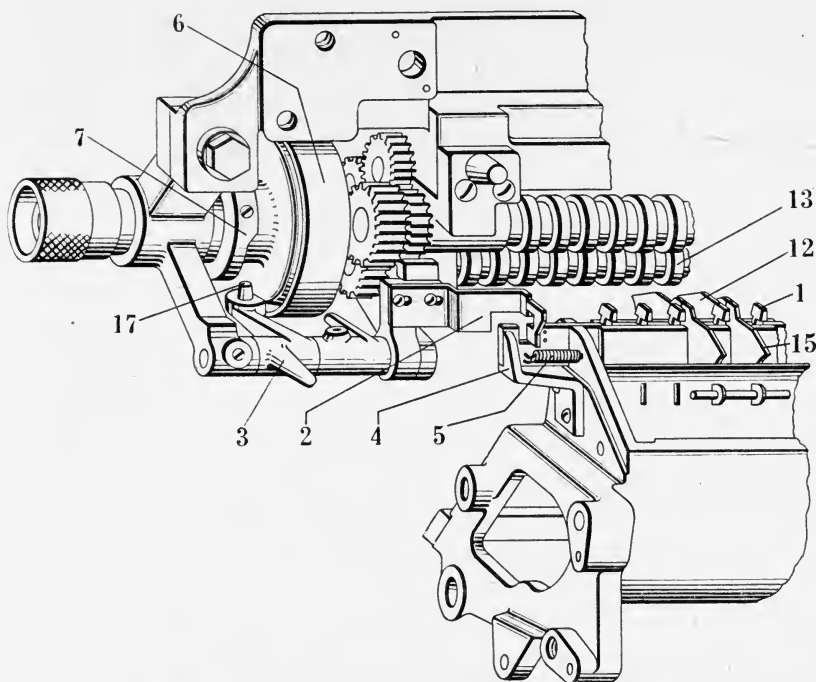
The Mixer Channel Entrance and Clutch Mechanism. The distributor stopping device is similar to that used on the single distributor Intertypes, but some of the parts are made in slightly different form.
